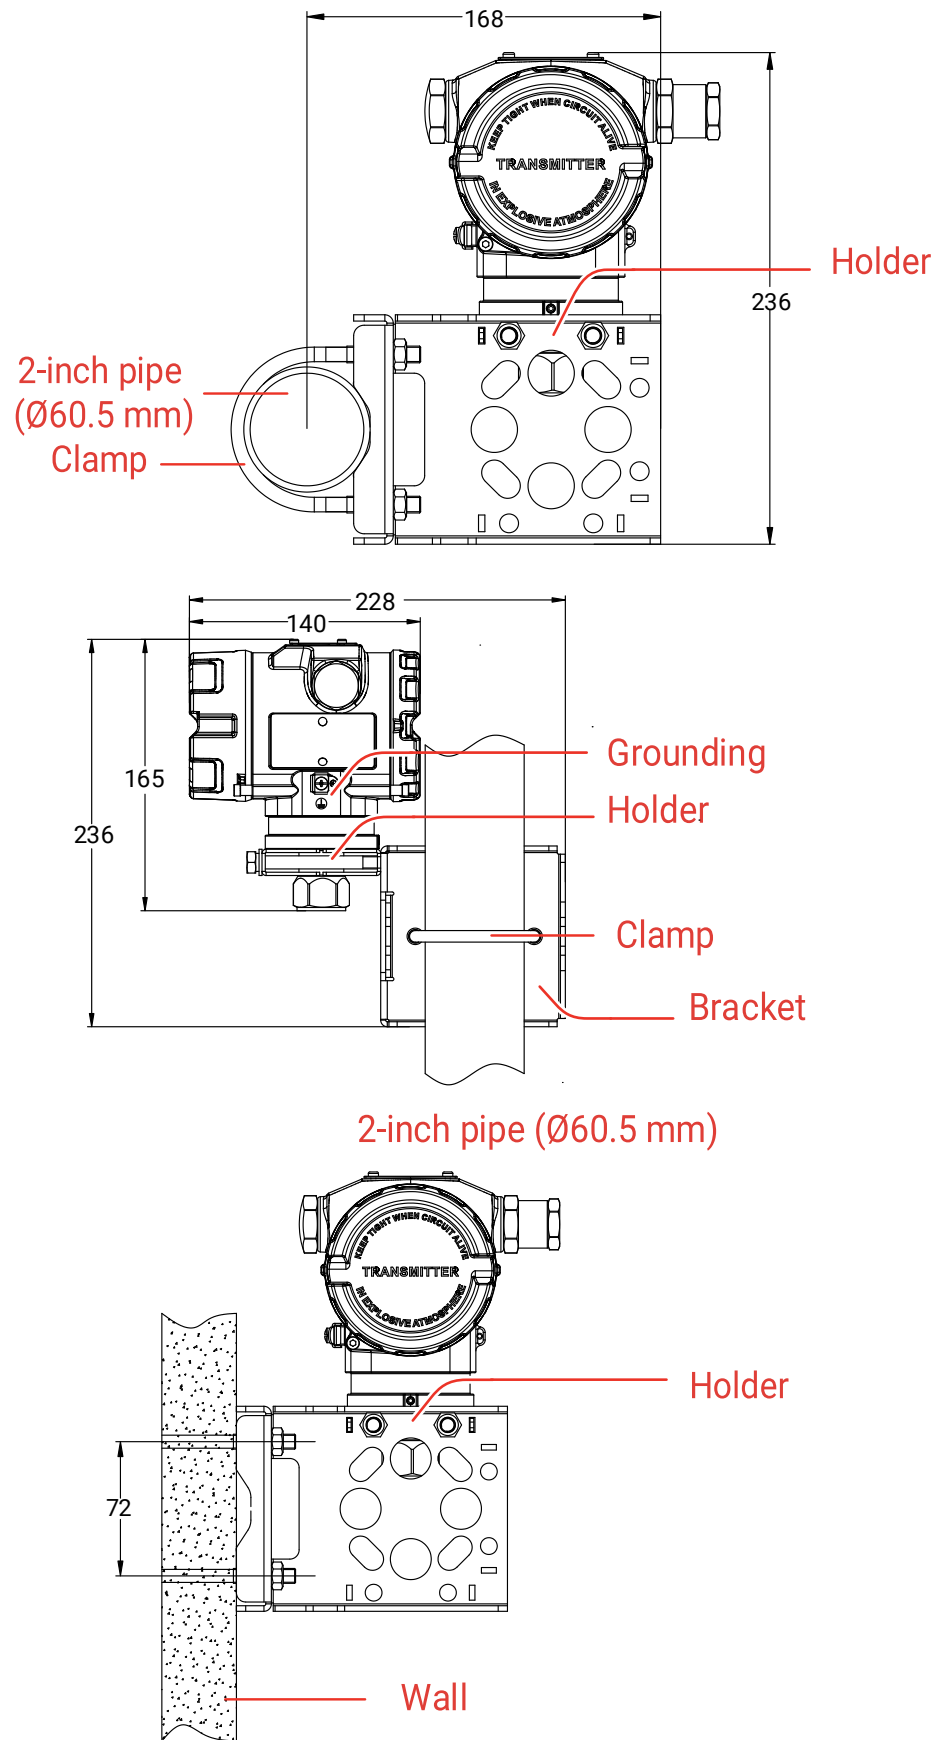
Bracket mounting of gauge and absolute pressure transmitter
